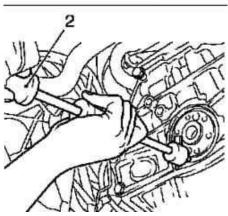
Removing the omentum: 1 - a special tool KM 6624; 2 - special tools KM-328-B, and KM 6624
